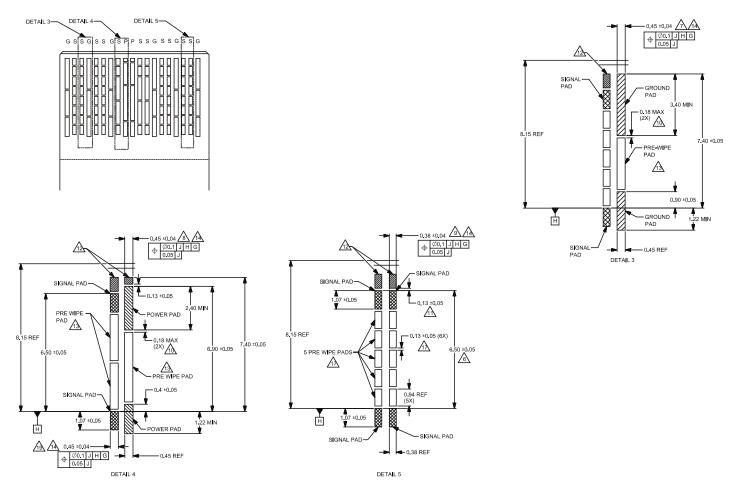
QSFP-DD1600 improved detail module paddle card dimensions
